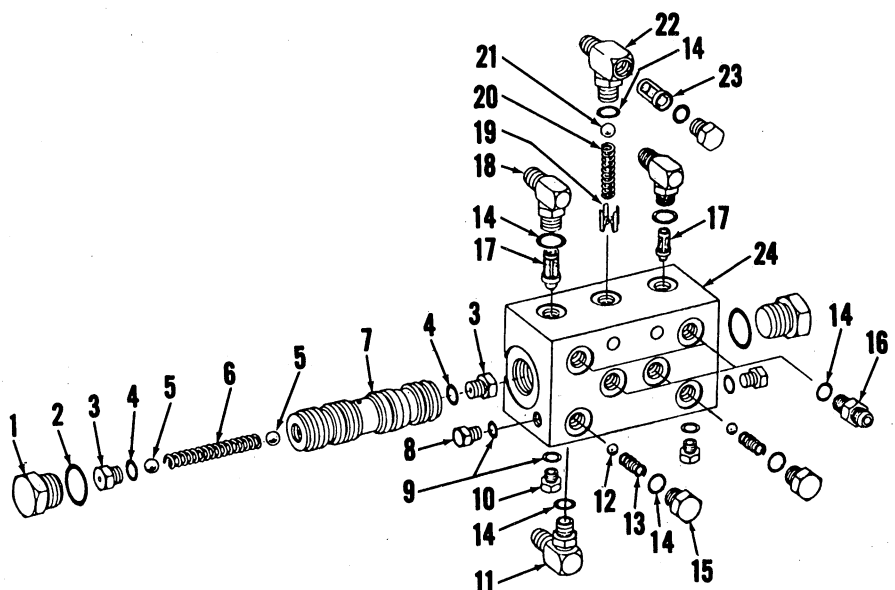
Exploded view of typical power steering control valve assembly. Additional parts are used on models with mechanical front-wheel drive (Fig. 36).
